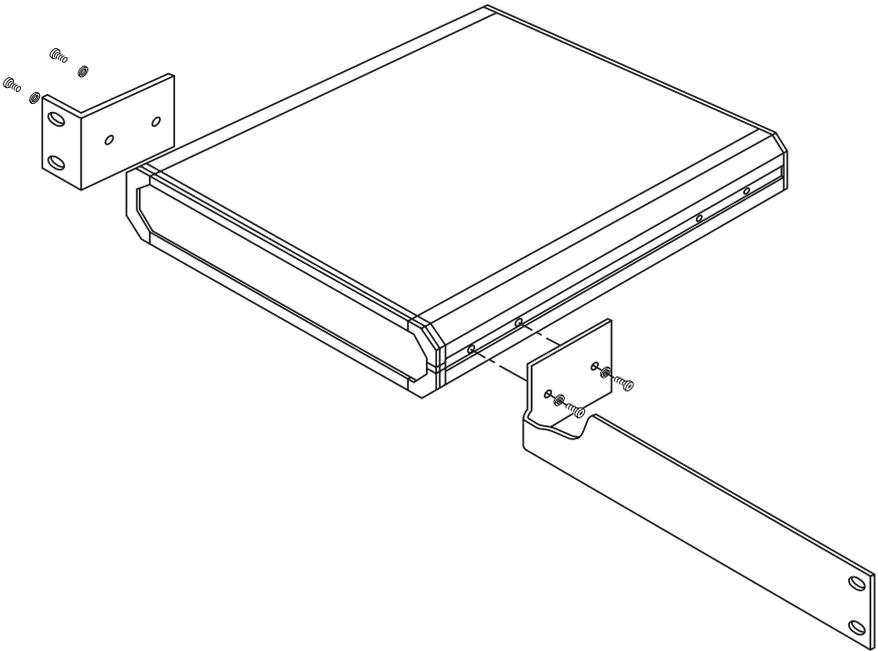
Preparing a single LHM-19.2 for mounting in a 19" rack.
